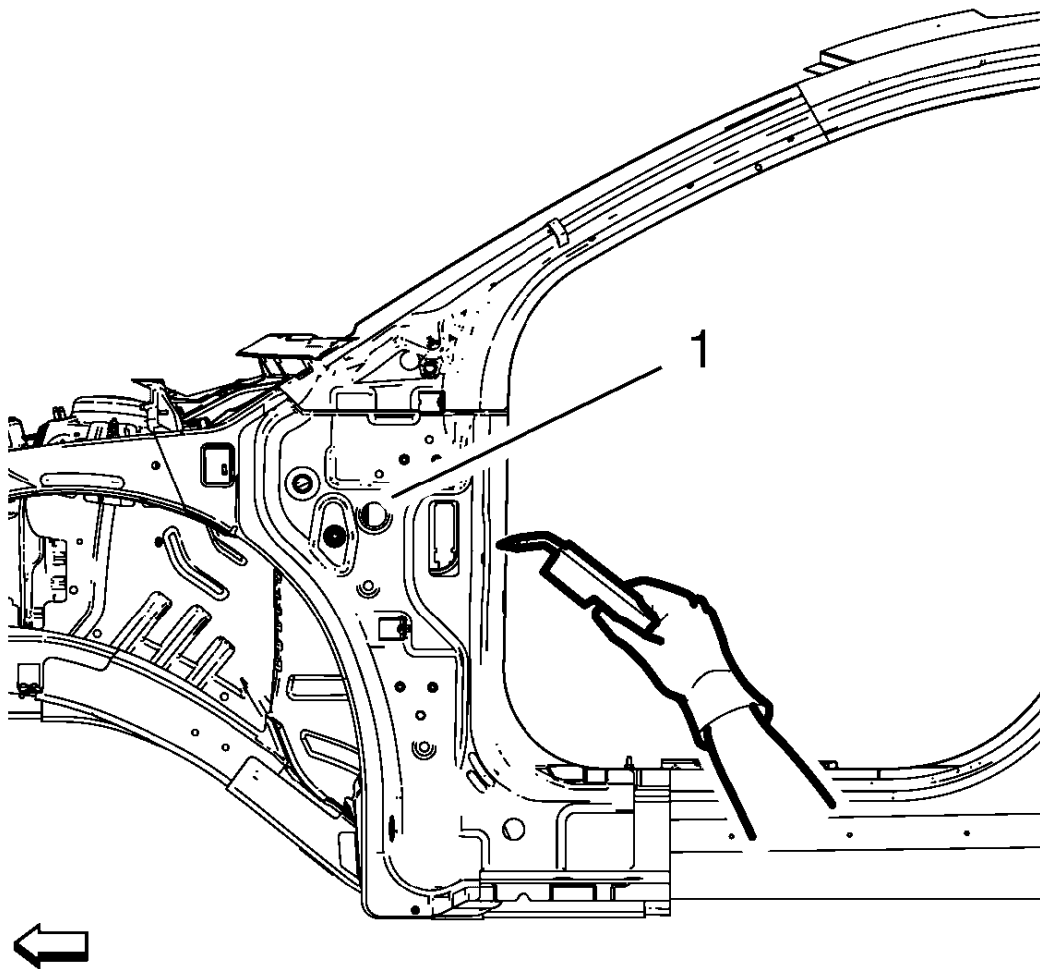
Welding Body Hinge Pillar Lower Reinforcement
